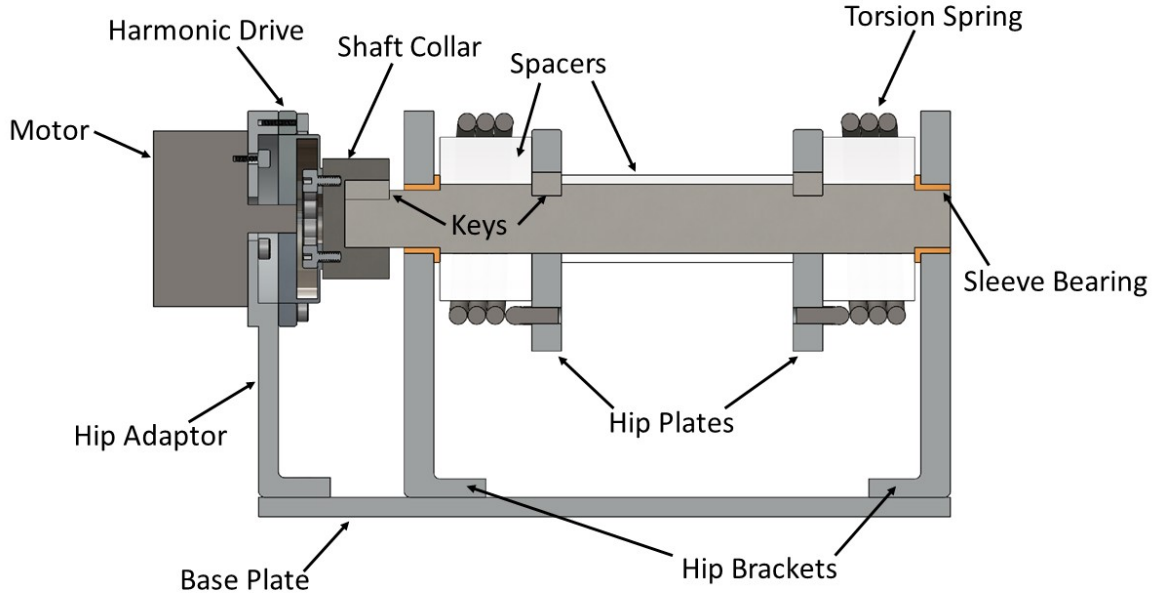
Section view of hip control shaft and its supporting brackets and adaptor
